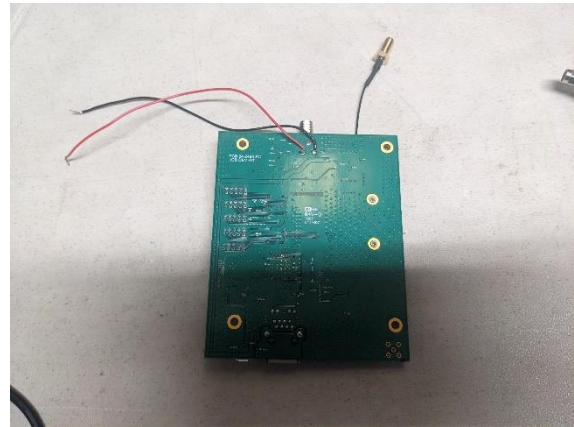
Rear View of the EUT module With evaluation board.
